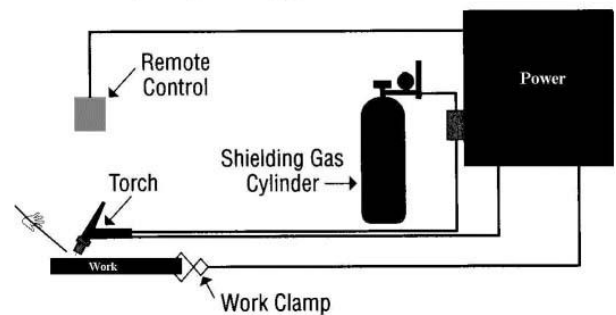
Gas Tungsten Arc Welding Process
